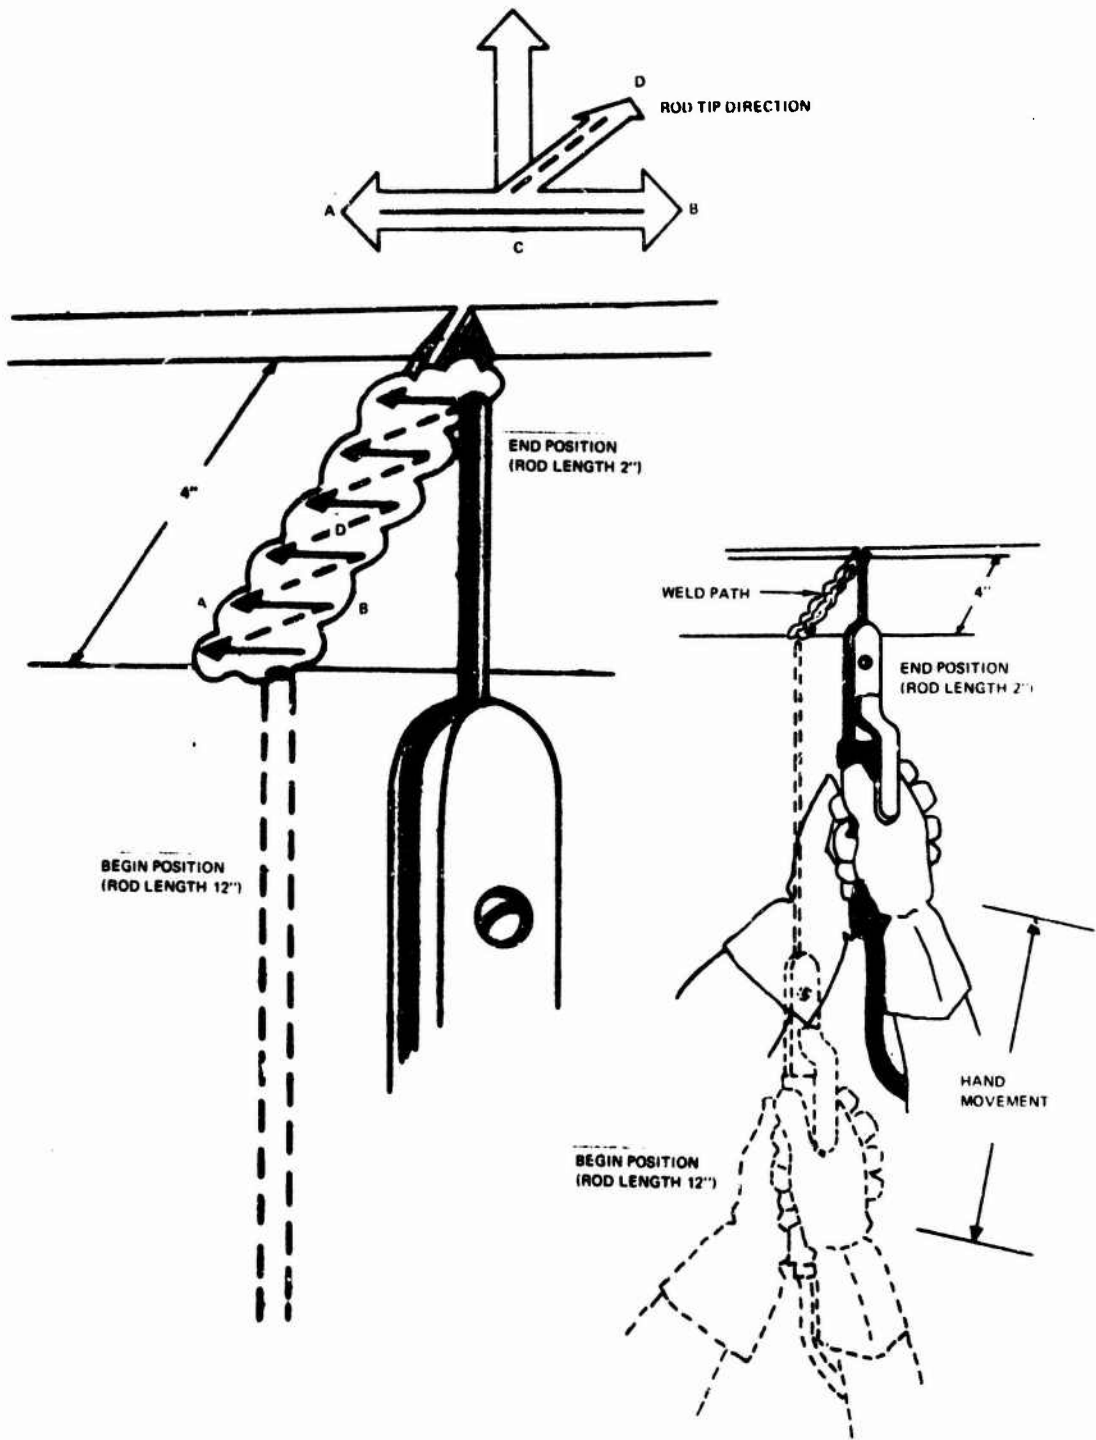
Welder movement while arc-welding one pass and consuming 10 in. of electrode (not to scale).
